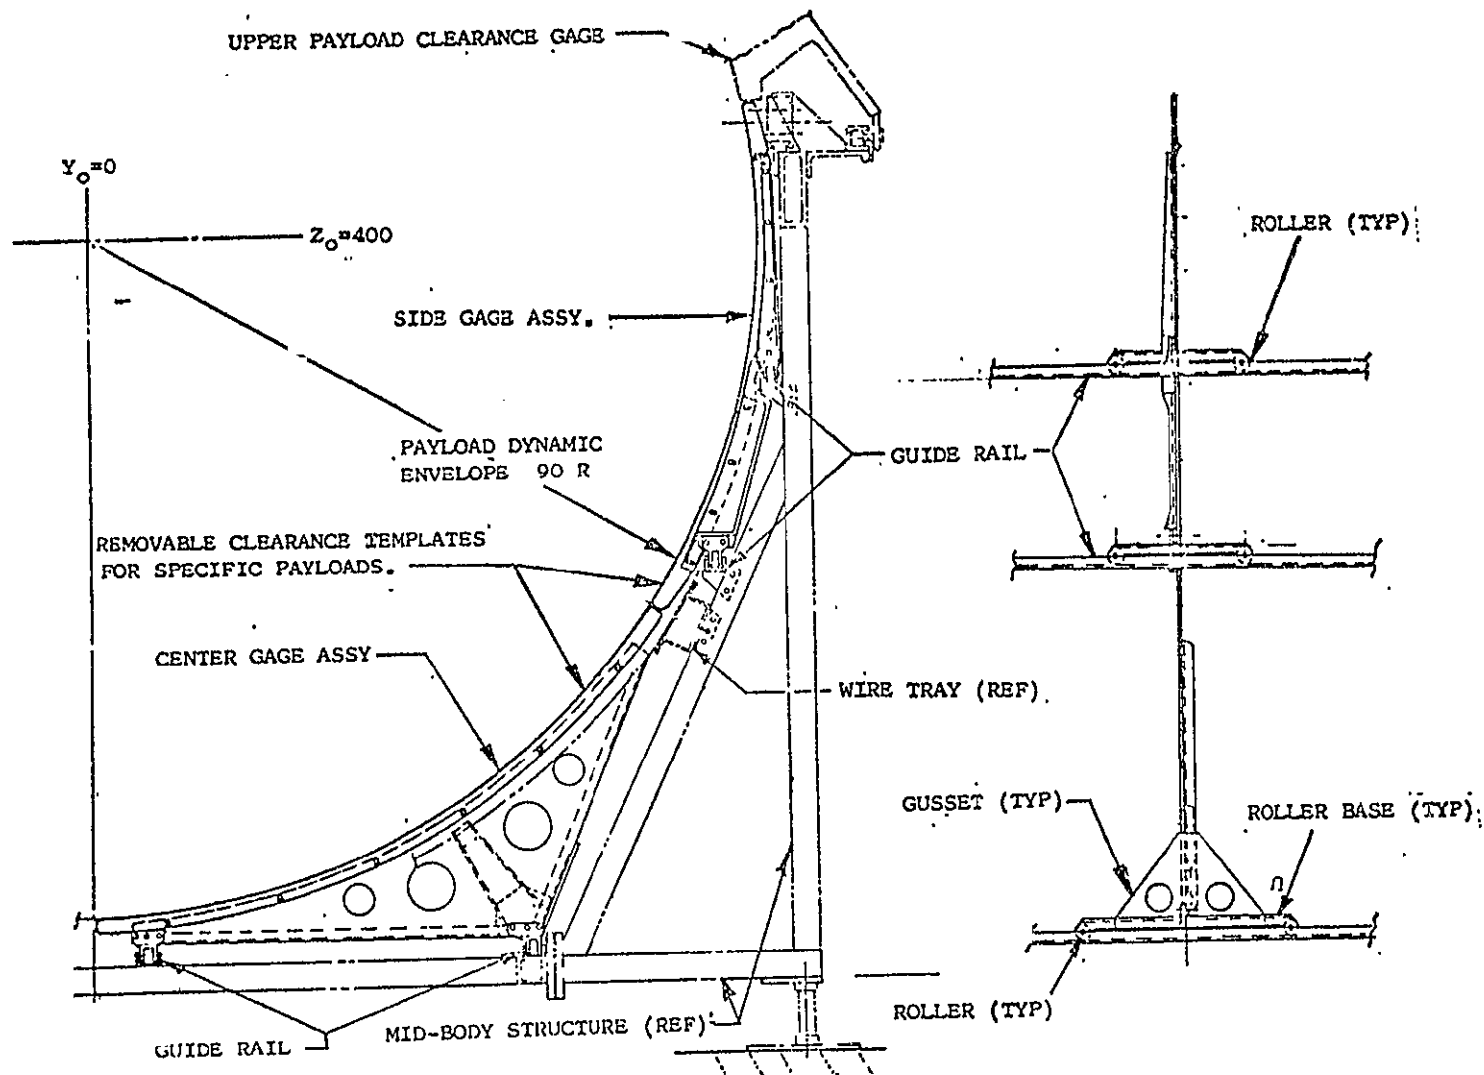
LOWER PAYLOAD CLEARANCE GAGE
